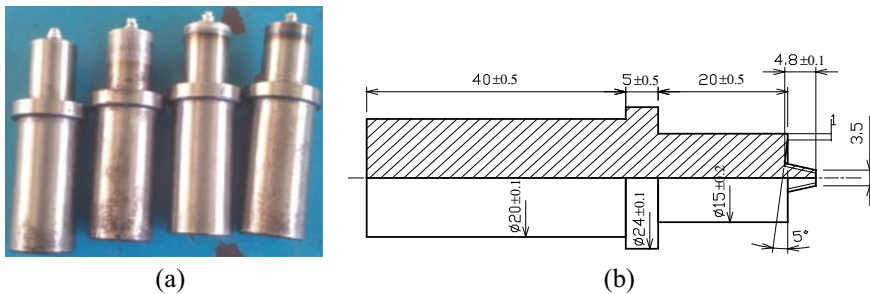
A photo (a) and detailed design parameters (b) of the FSW tool
